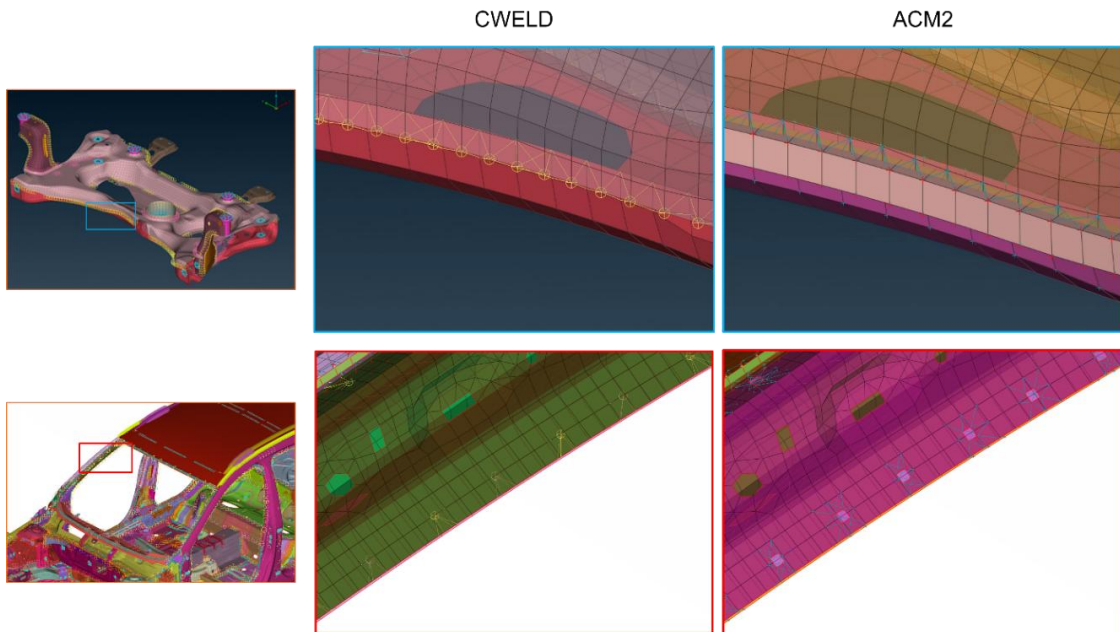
Conversion of CWELDs configuration to its ACM2 equivalent using the Connection Assembly tool from ANSA pre-processor.
